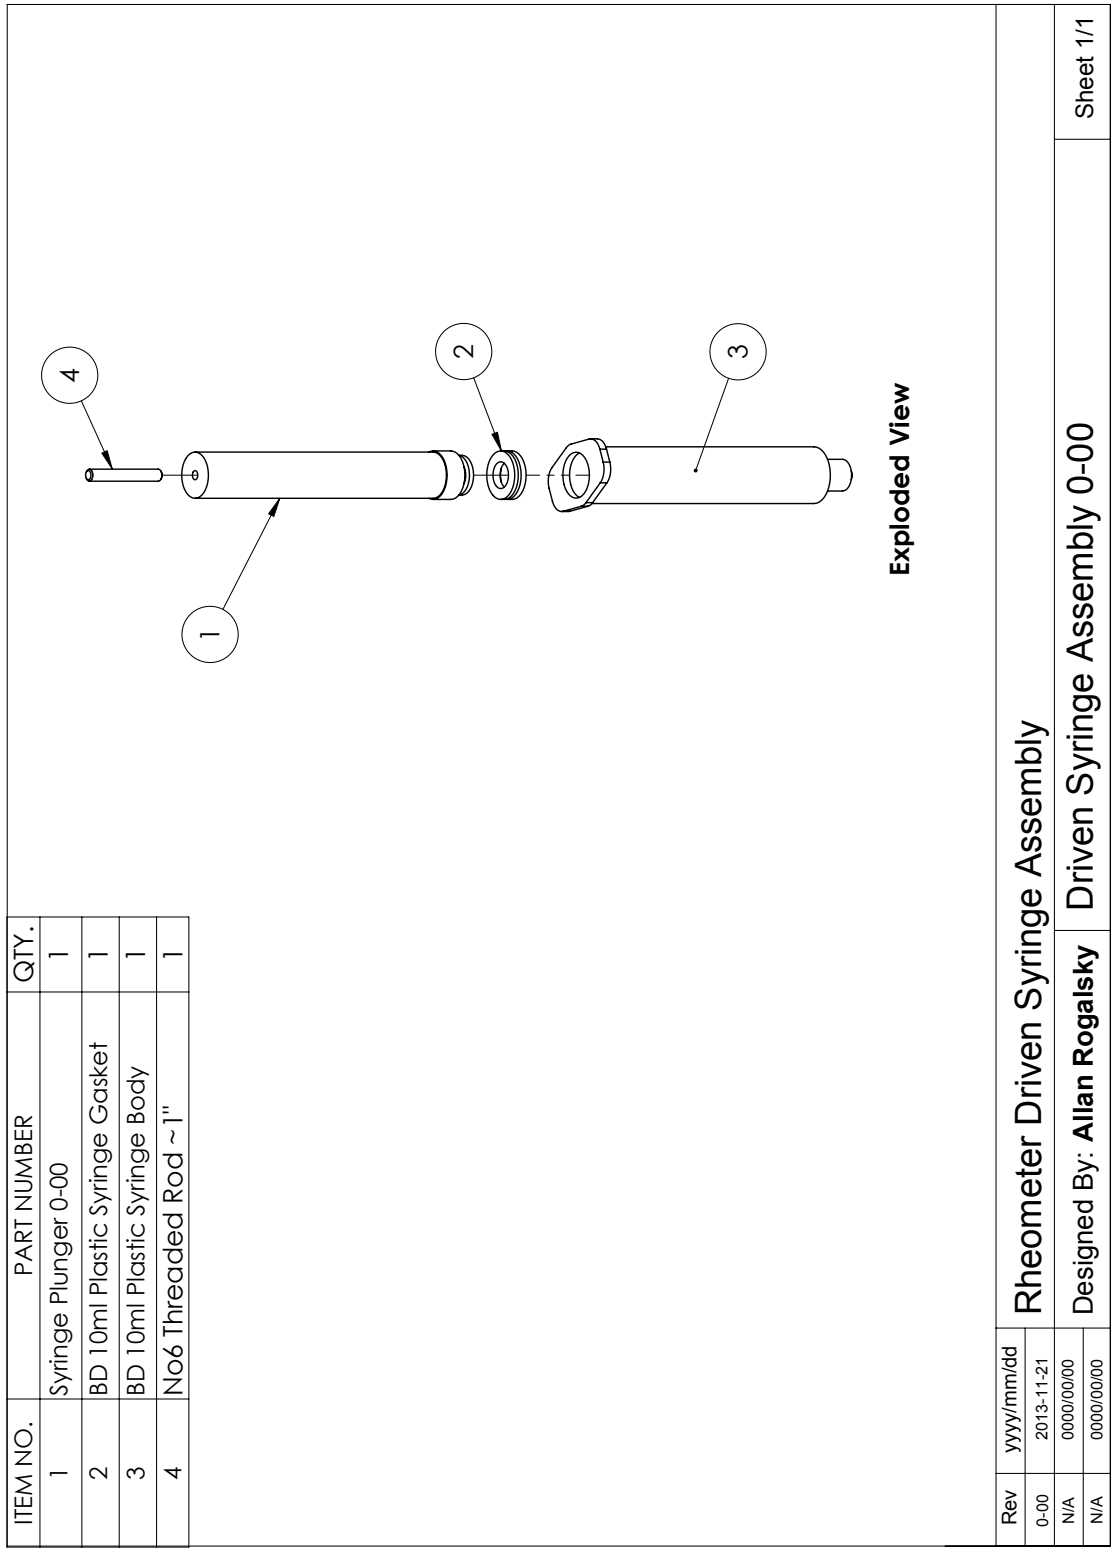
Capillary Rheometer / Driven Syringe Assembly
